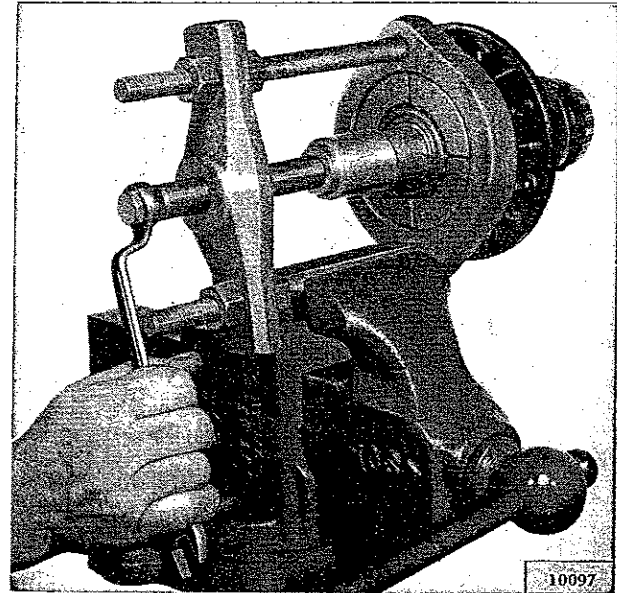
REMOVING CONE AND ROLLER WITH PULLER
